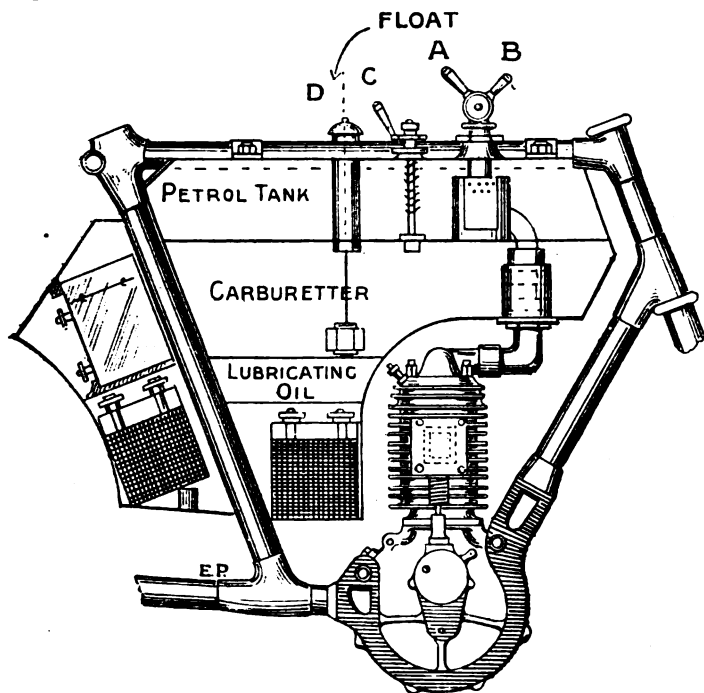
Sectional View of Tank and Carburettor of Rex Motor-Bicycle.
